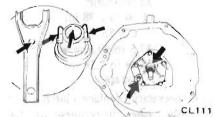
Lubricating points of withdrawal lever and front cover
